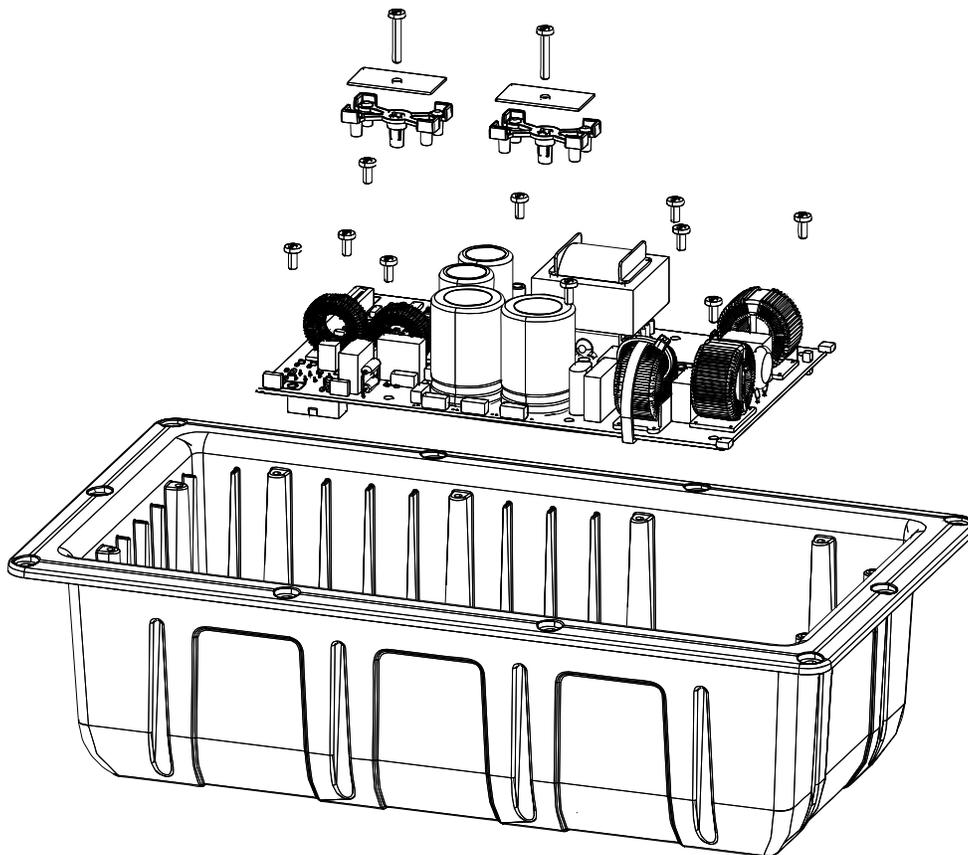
PSU/amplifier PCB removal from the bucket chassis.
